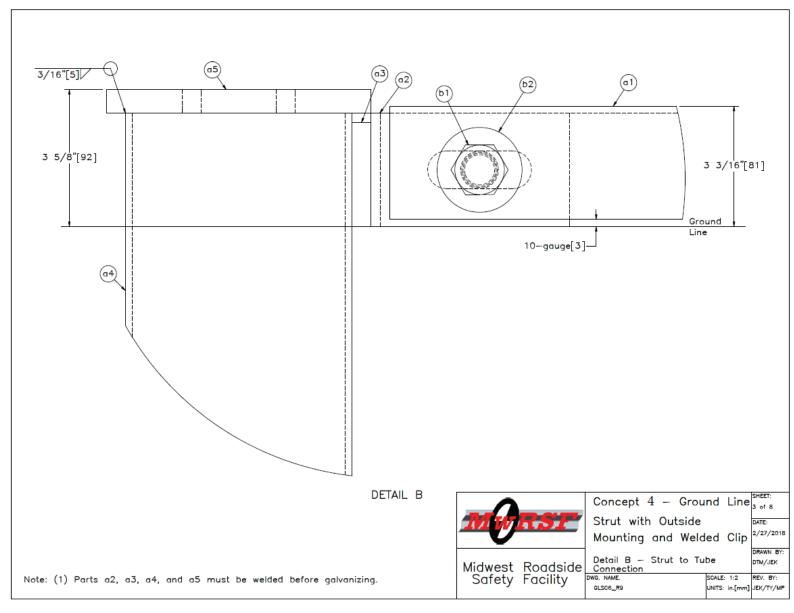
Ground Line Strut Concept No. 4 – Strut to Tube Connection
